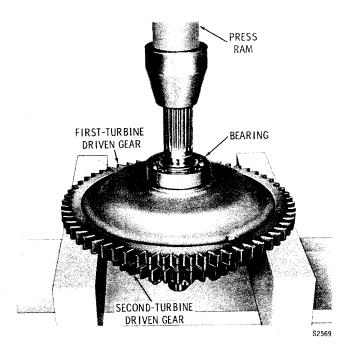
Pressing second-turbine driven gear assembly from freewheel clutch assembly
